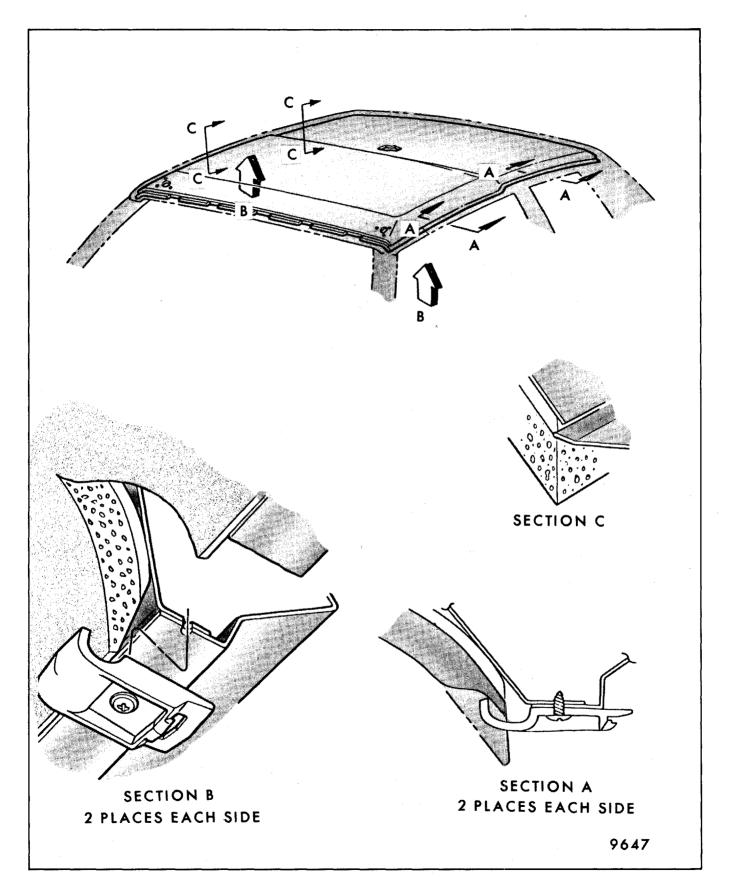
Formed Headlining Assembly - A Coupes Shown, 09-19 Styles Similar
